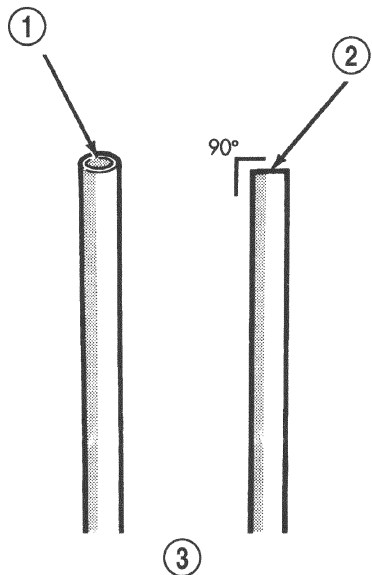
Cutting And Flaring Of Brake Fluid Tubing
